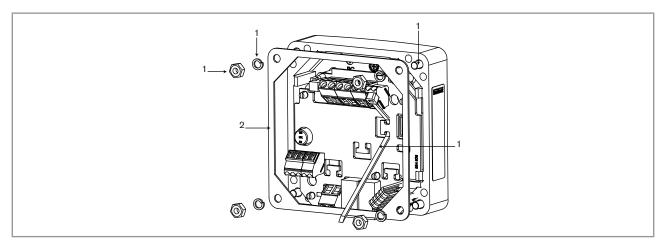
Exploded view of the spare parts of a flow transmitter 8025 in panel version
